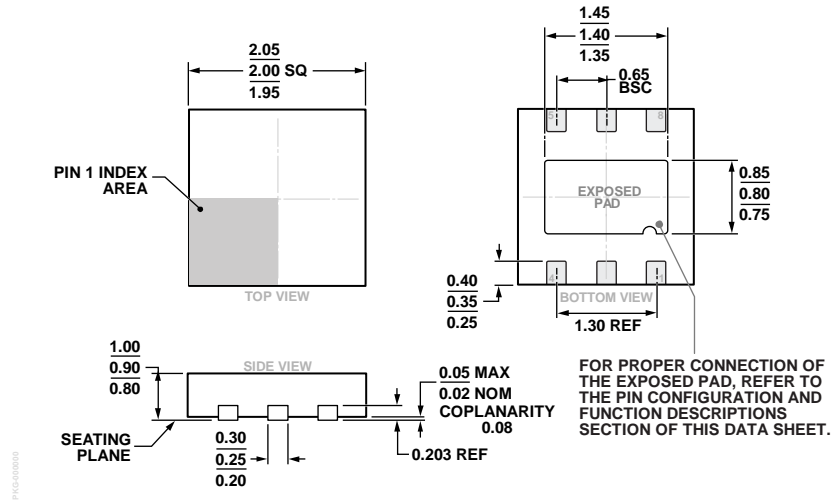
6-Lead Lead Frame Chip Scale Package [LFCSP]
